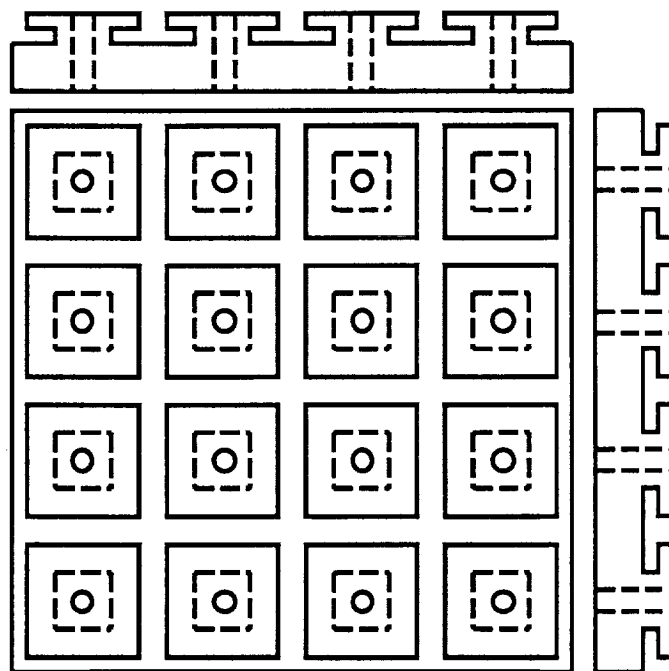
UNIT TILE OF THE 2-STEP MACHINE BED
